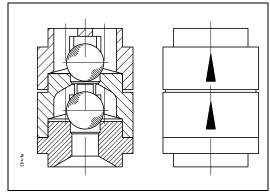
Double Ball Valve - Sectional and Plan View
